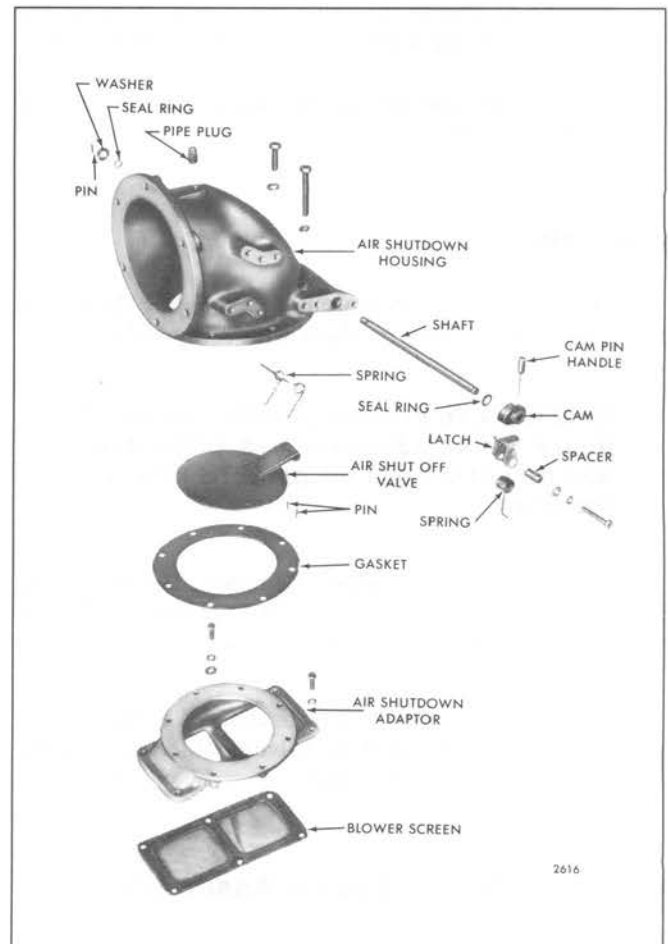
Air Shutdown Housing Details and Relative Location of Parts (Non-turbocharged Engines)
